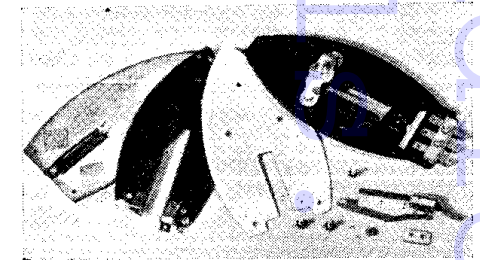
These are the parts when the iron is dismantled sufficiently for replacement of the element and for most adjustments to the thermostat
